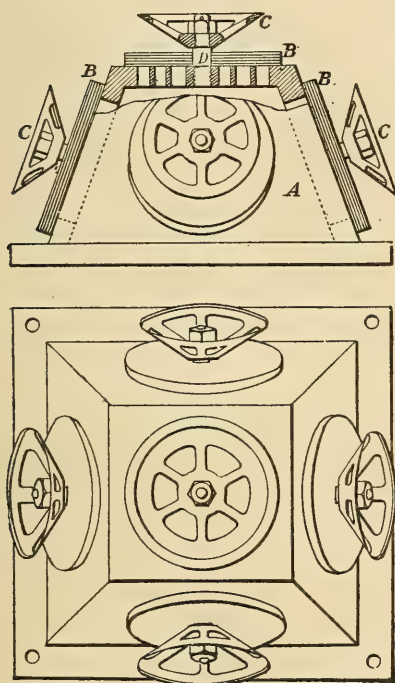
Box Valve Seat with sloping sides, arranged for five Valves for the Air Pumps.
